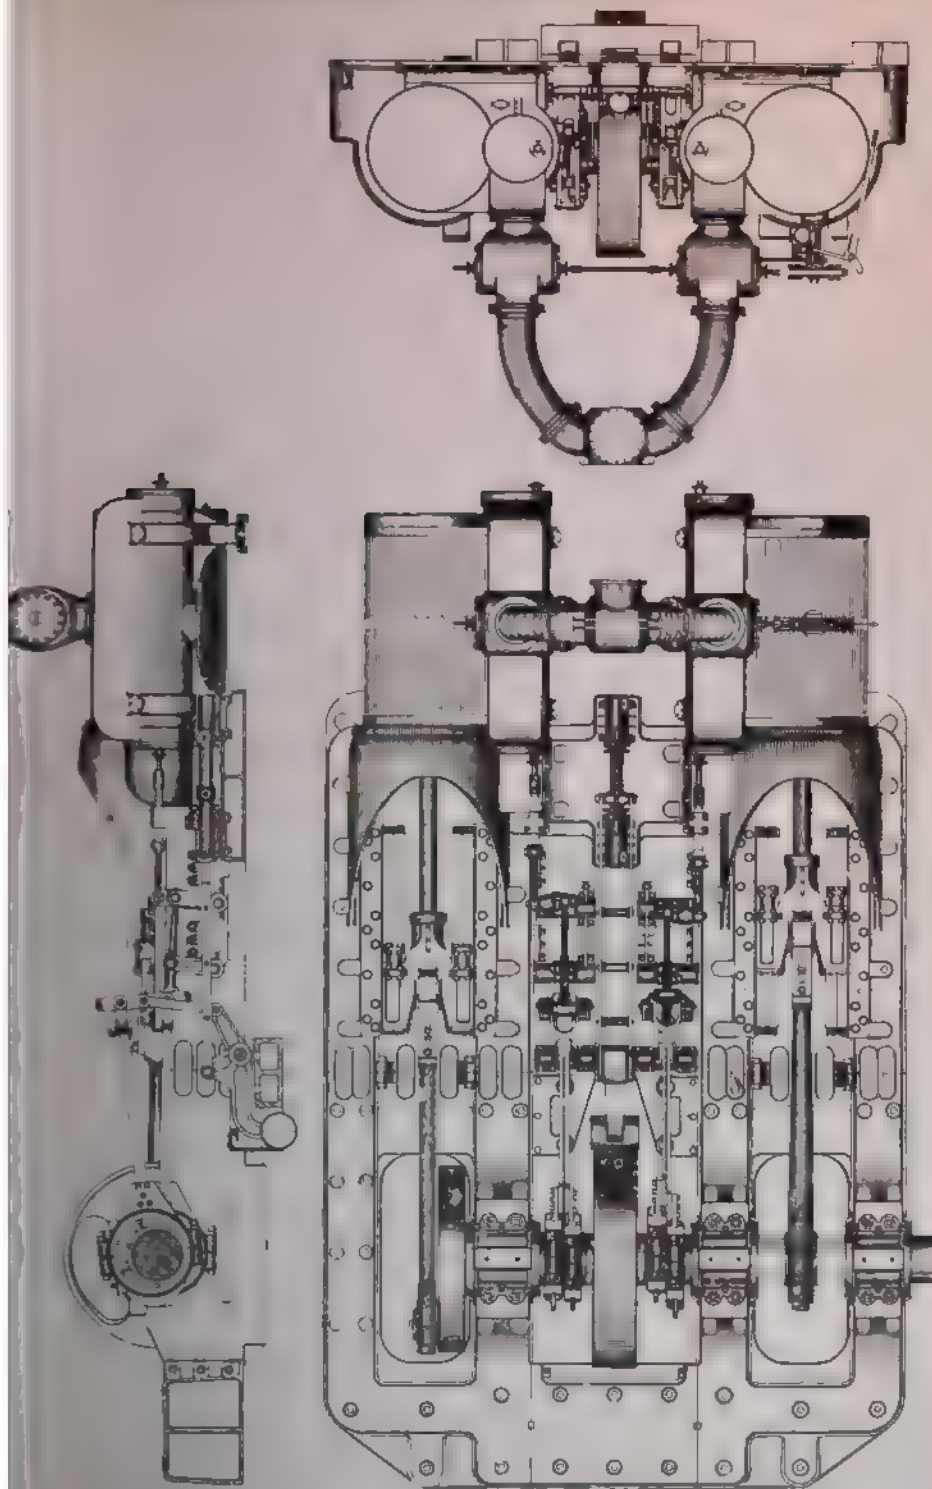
DIRECT-COUPLED REVERSING ENGINE.
